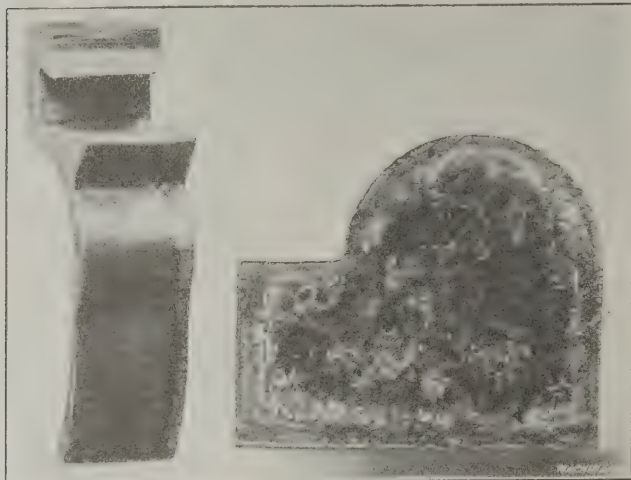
Sample Pieces cut from Steel Plate by the Oxygraph
